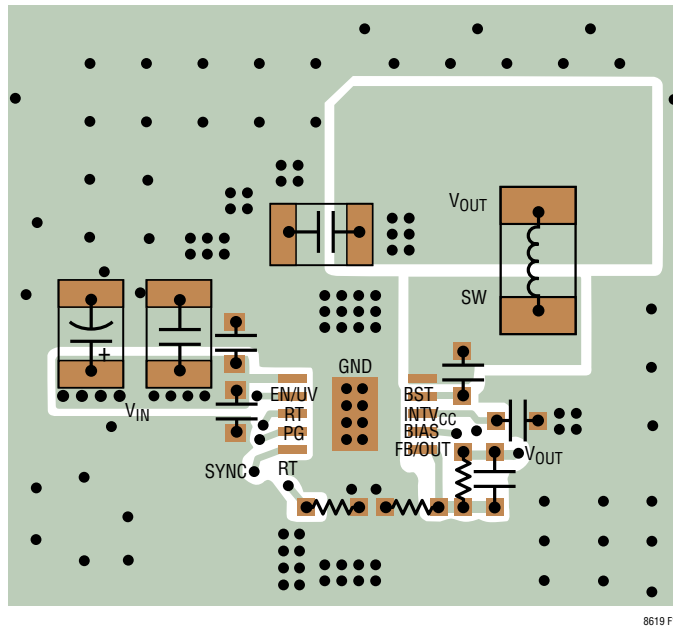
Recommended PCB Layout for LT8619 10-Pin DFN
